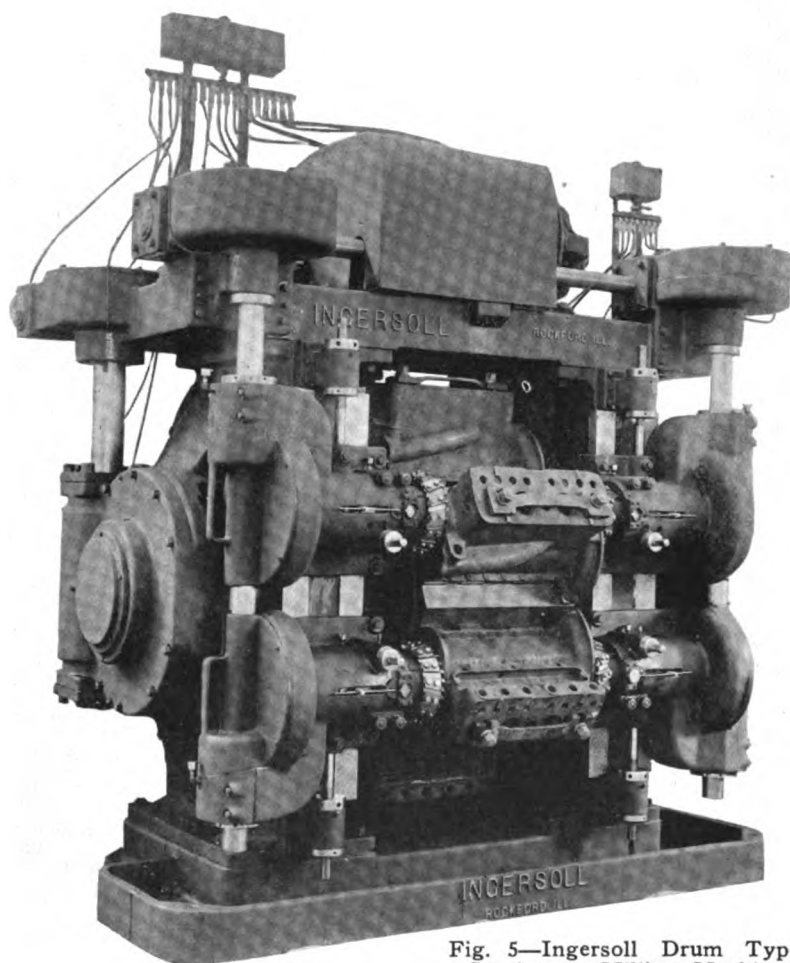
Ingersoll Drum Type Continuous Milling Machine
